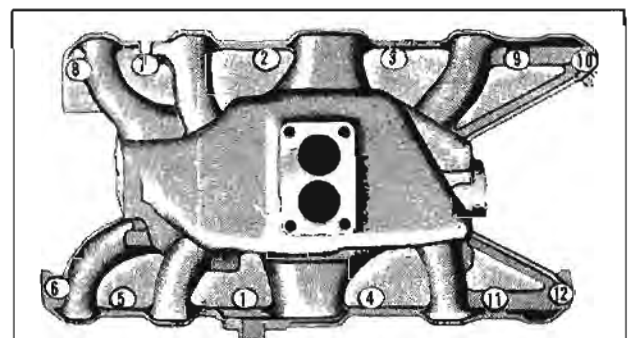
Intake Manifold Bolt Torque Sequence
